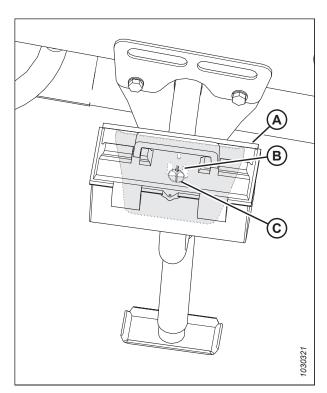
Toolbox Mounted on Jack Stand Bracket
